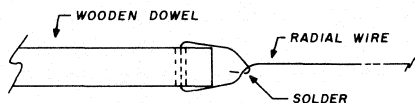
Method for securing radial wire to the wooden threading tool, or "needle."
